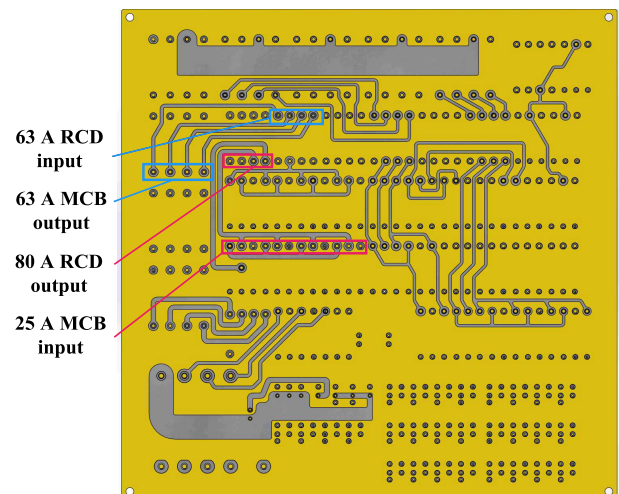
CAD model of CL 7 layered on IZO 6.
